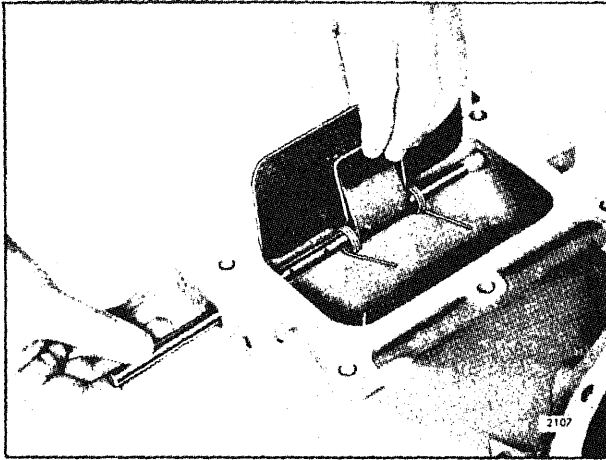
Installing Air Shut-Off Valve Spring and Valve
